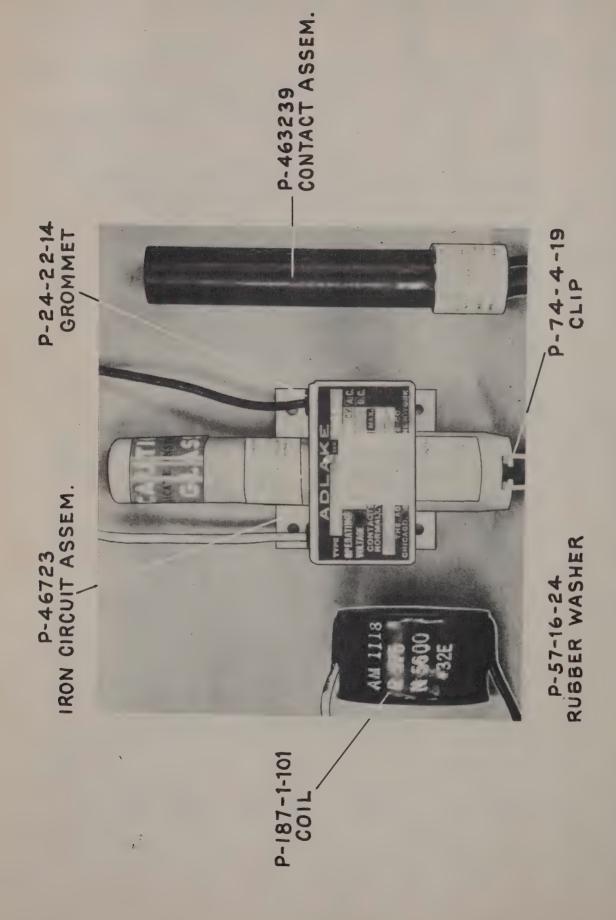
ADAMS AND WESTLAKE COMPANY RELAY ASSEMBLY (K5-B)
